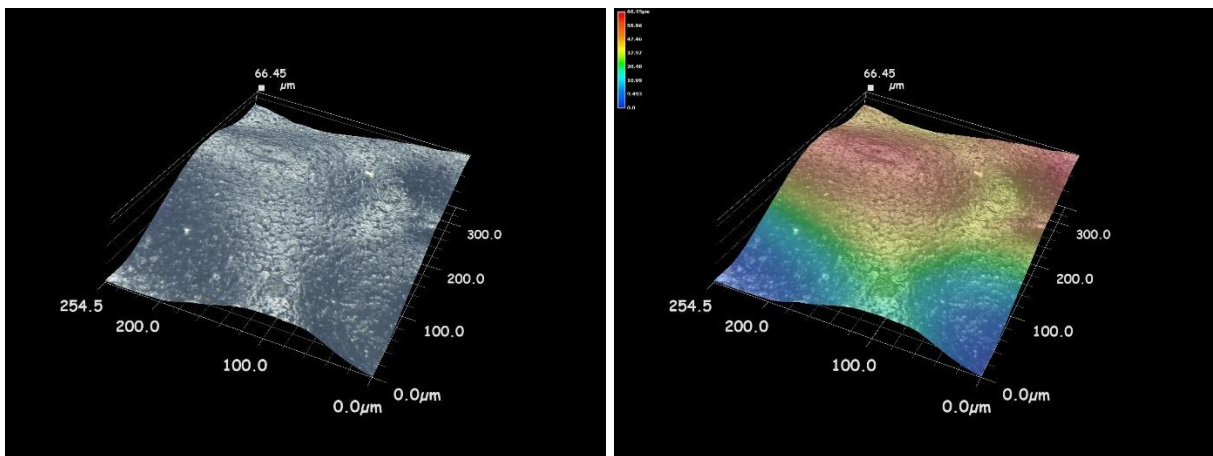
3D representation: the surface of 3D print-extruded PP (thickness: 3.5 - 5.5 mm).
